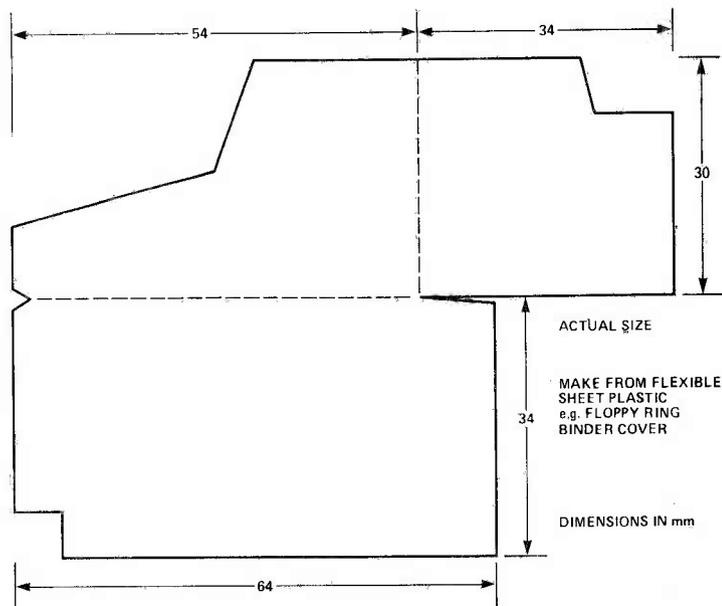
Pattern for the battery holder. This should be cut out of thin plastic sheet, an old ring binder cover, for example.
